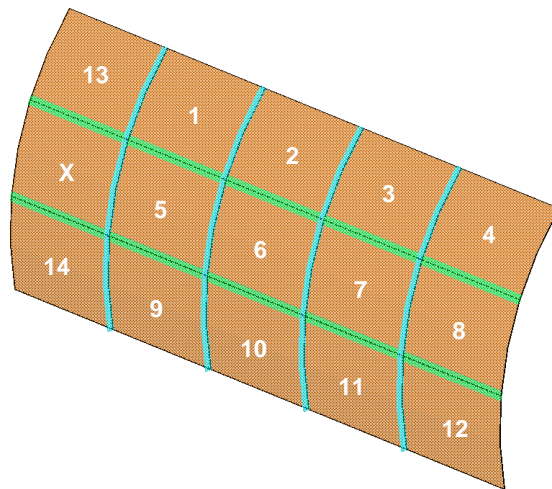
Sidewall structure divided into fifteen bay subsystems by longitudinal stringers and ring frames.
